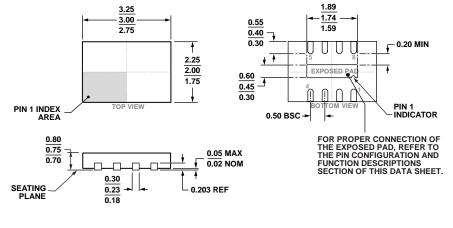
8-Lead Lead Frame Chip Scale Package [LFCSP] 2 mm × 3 mm Body and 0.75 mm Package Height (CP-8-23) Dimensions shown in millimeters
